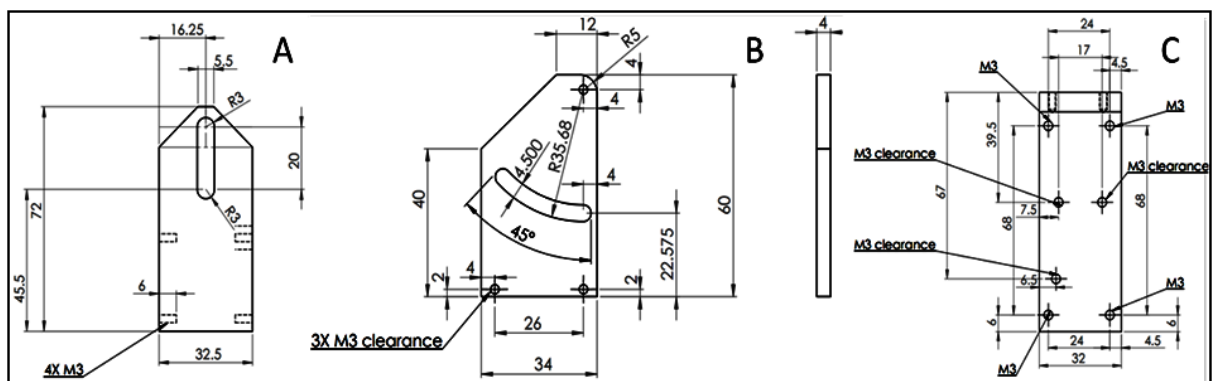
Subcomponents of the custom built camera mount, (A) base plate (B) side bracket and (C) top plate
